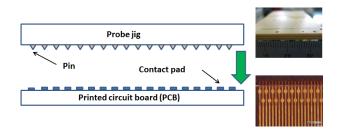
Continuity test of a PCB wiring pattern via a probe jig
